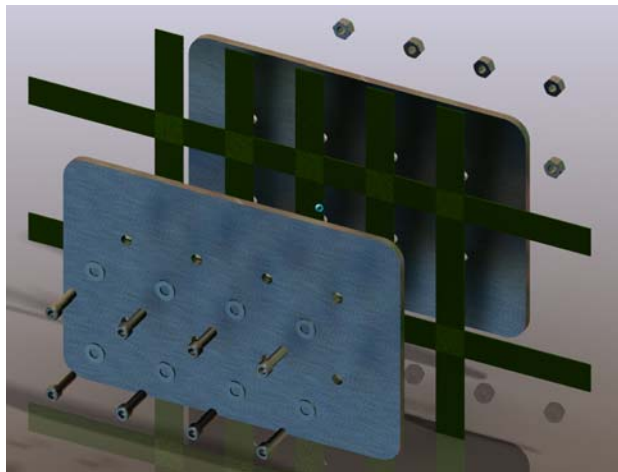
Conceptual rendering of mounting mechanism in an exploded view
